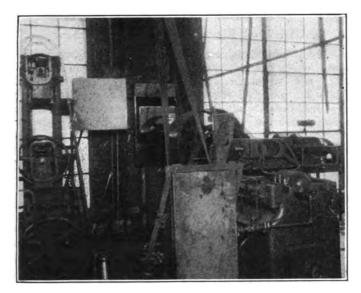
Close-Up of Thompson Superheater Fiue Electric Welding Machine
